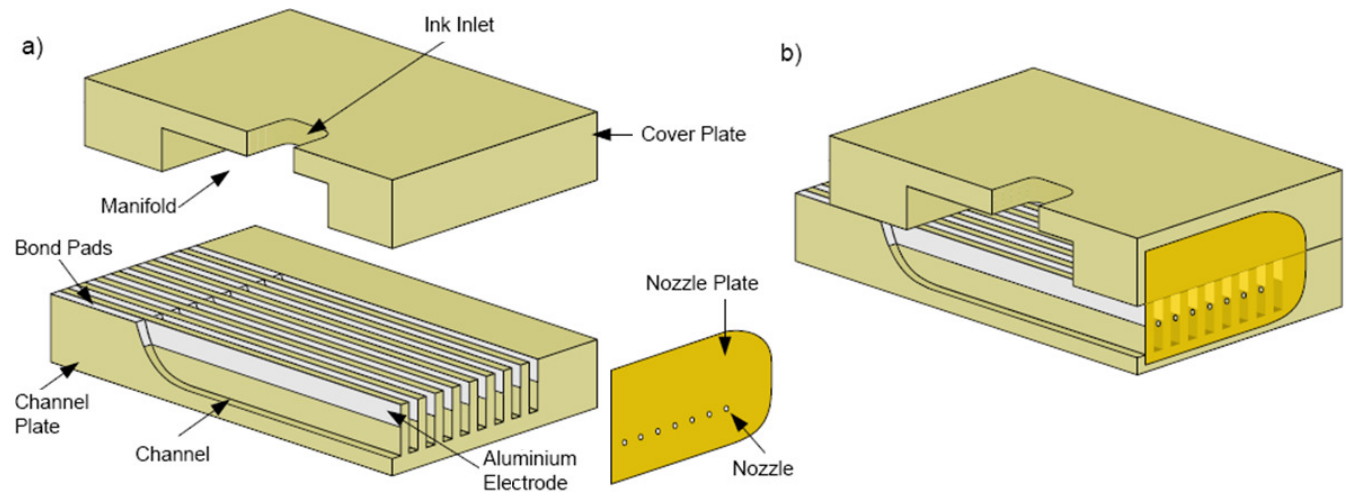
Xaar-type shear mode printhead a) components and b) assembled actuator (Brunahl 2003)
